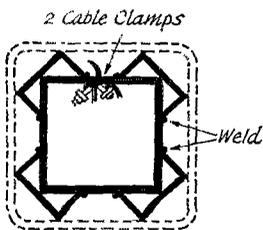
This sketch shows how short pieces of channel iron, welded across the corners of the 4-inch column near its bottom end, keep the inner column central in the outer column. The corners of the channel pieces should be filed slightly round to make a loose fit.
